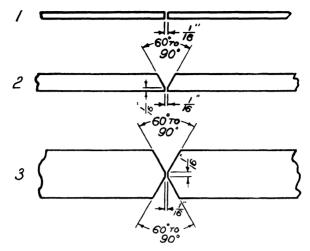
The preparation of steel plates for arc welding: 1 Thin metal up to 1/8"; 2 Metal of 1/8" thickness up that can be welded on one side; 3 Metal of 1/4" thickness and up that may be welded on both sides
